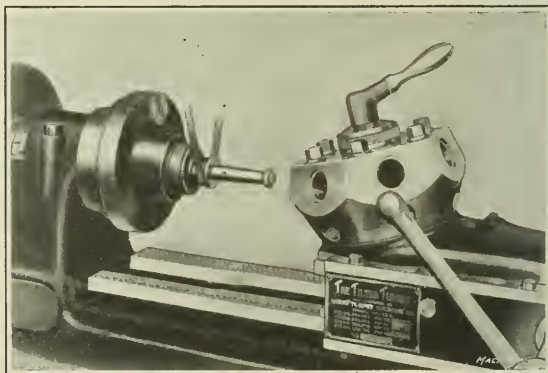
Grinding Turret Holes in Perfect Alignment with Spindle
